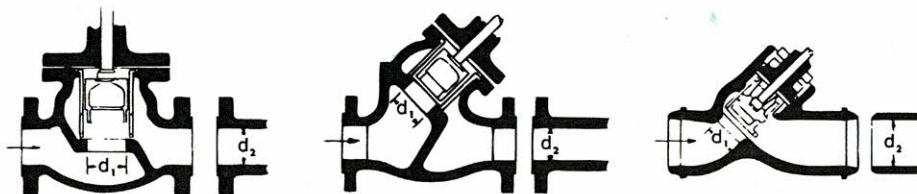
Stop check valves: globe type (left), Y-pattern with cage guide (center), and Y-pattern with disc fully removed from the flow path (right). (courtesy of Crane Valve Co.)
